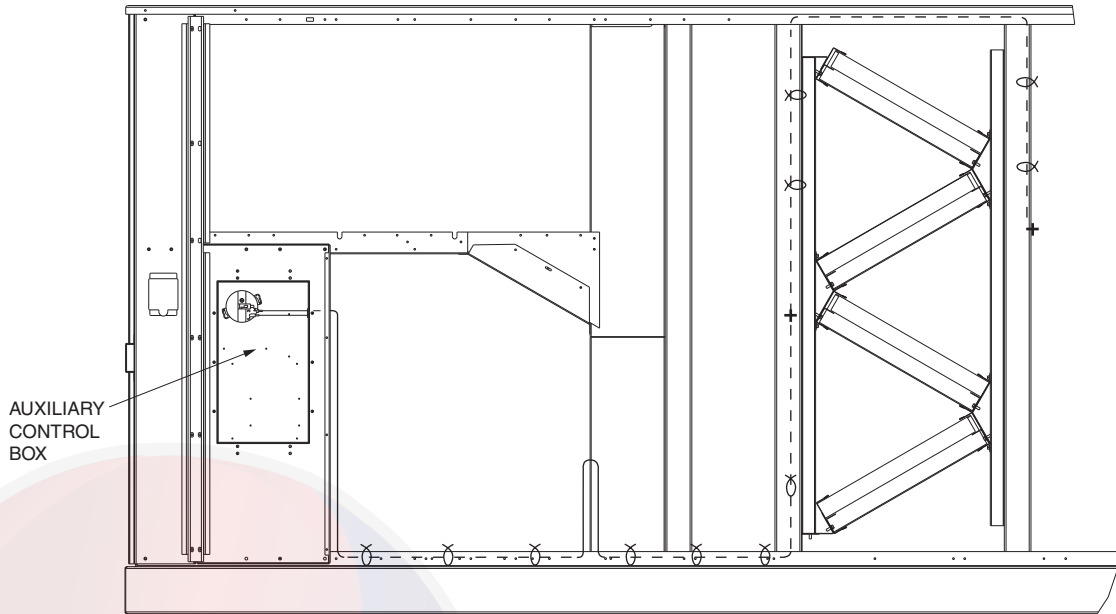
Auxiliary Control Box Location (Sizes 030-050)
